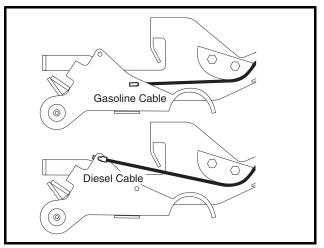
15 Z-Shaped Cable End in Hole at Pedal
